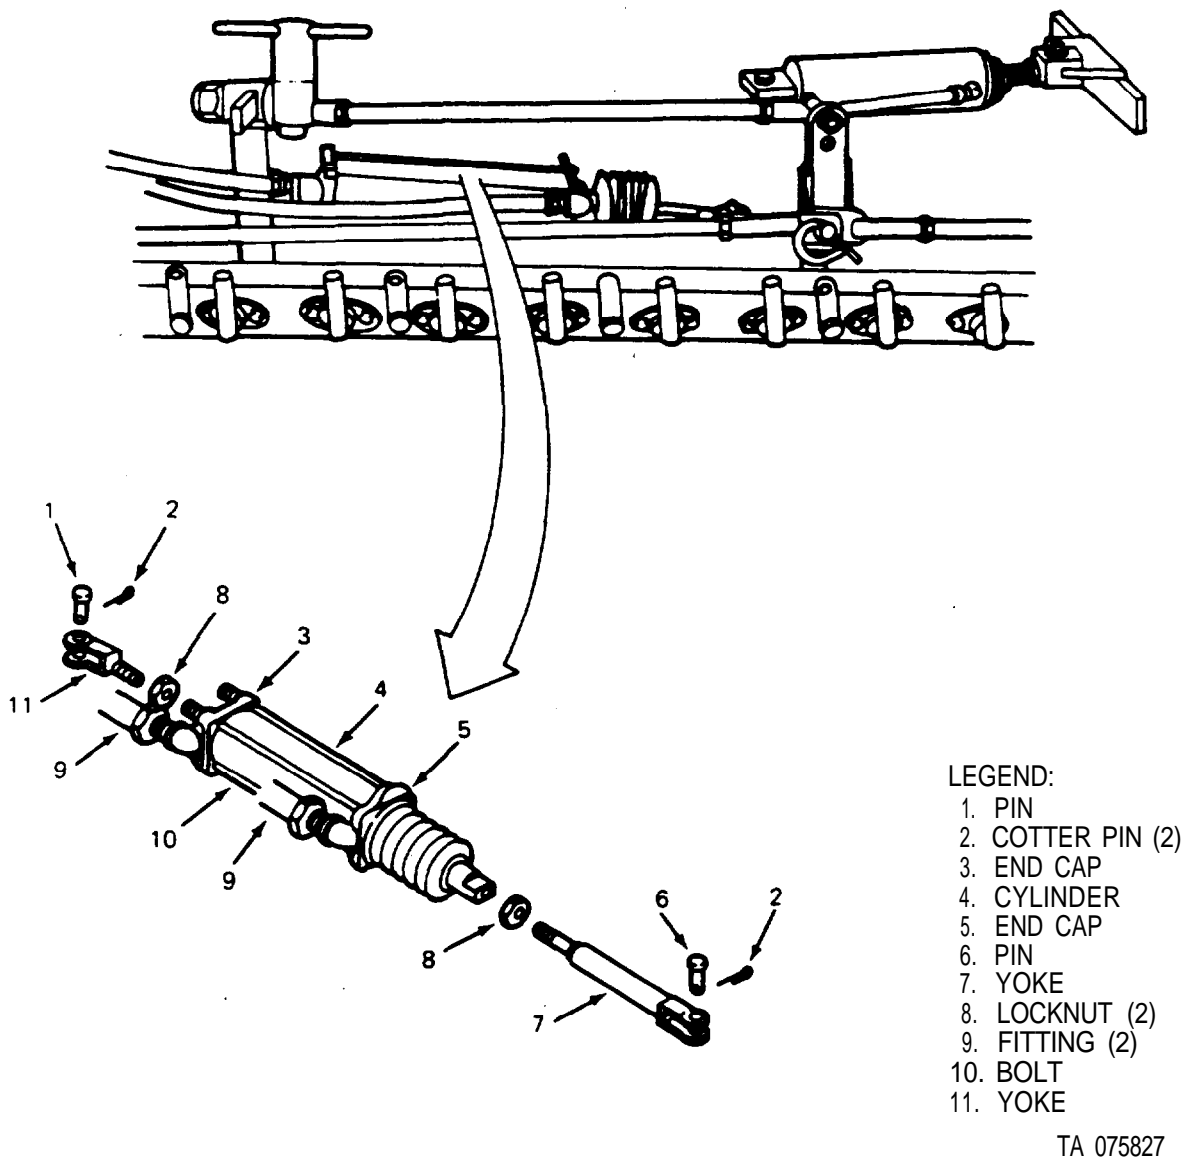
Remove/Install Bottom Bar On-Off Cylinder.
